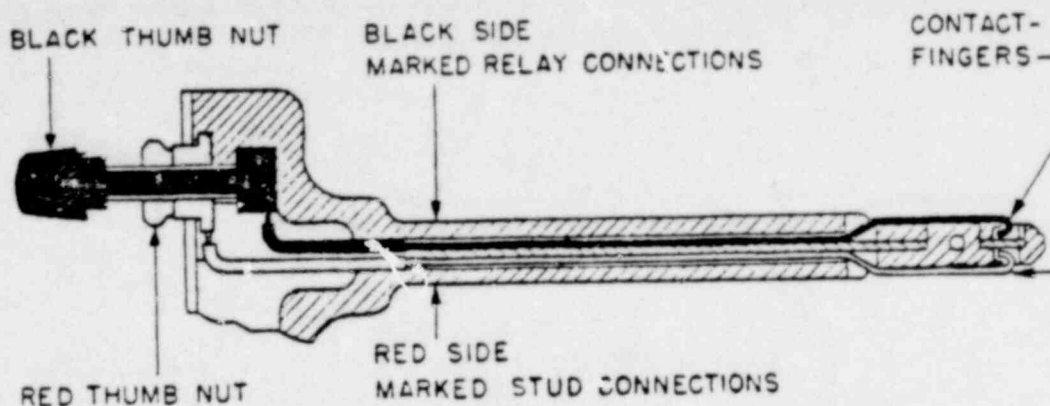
Sectional View of XLA12A Test Plug Showing Internal Wiring
